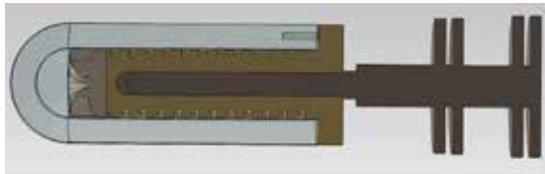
The next photo shows the structural layout of the lamp in a transverse longitudinal section
